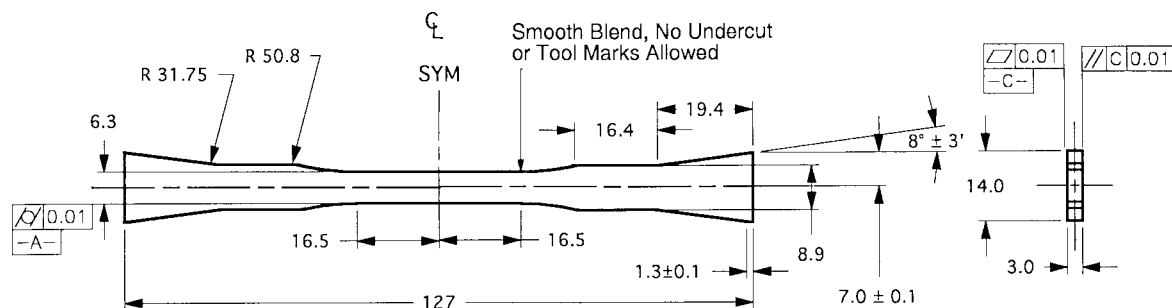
Example of a Contoured, Edge-Loaded Test Specimen Geometry (3)
